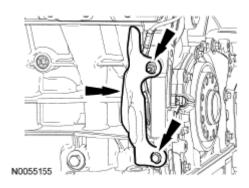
Locating Heat Shield Nut And Bolt Courtesy of FORD MOTOR CO.
